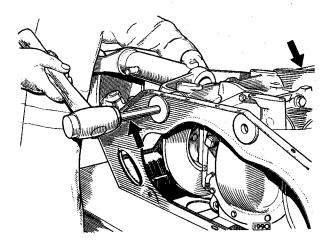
Tapping the dummy shafts into position at the wishbone inner fulcrum.
